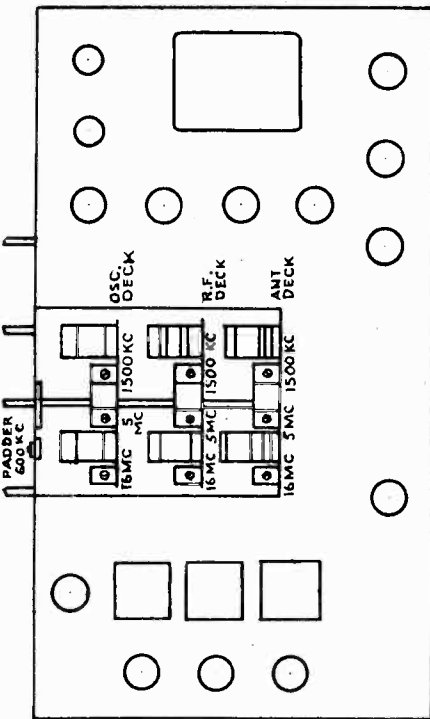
CHASSIS LAYOUT (BOTTOM VIEW)
